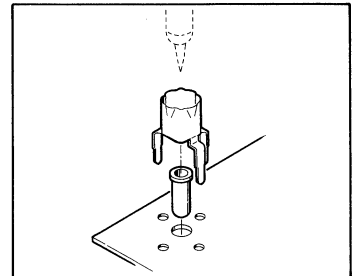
Typical ECB to Probe Tip Adaptor installation
